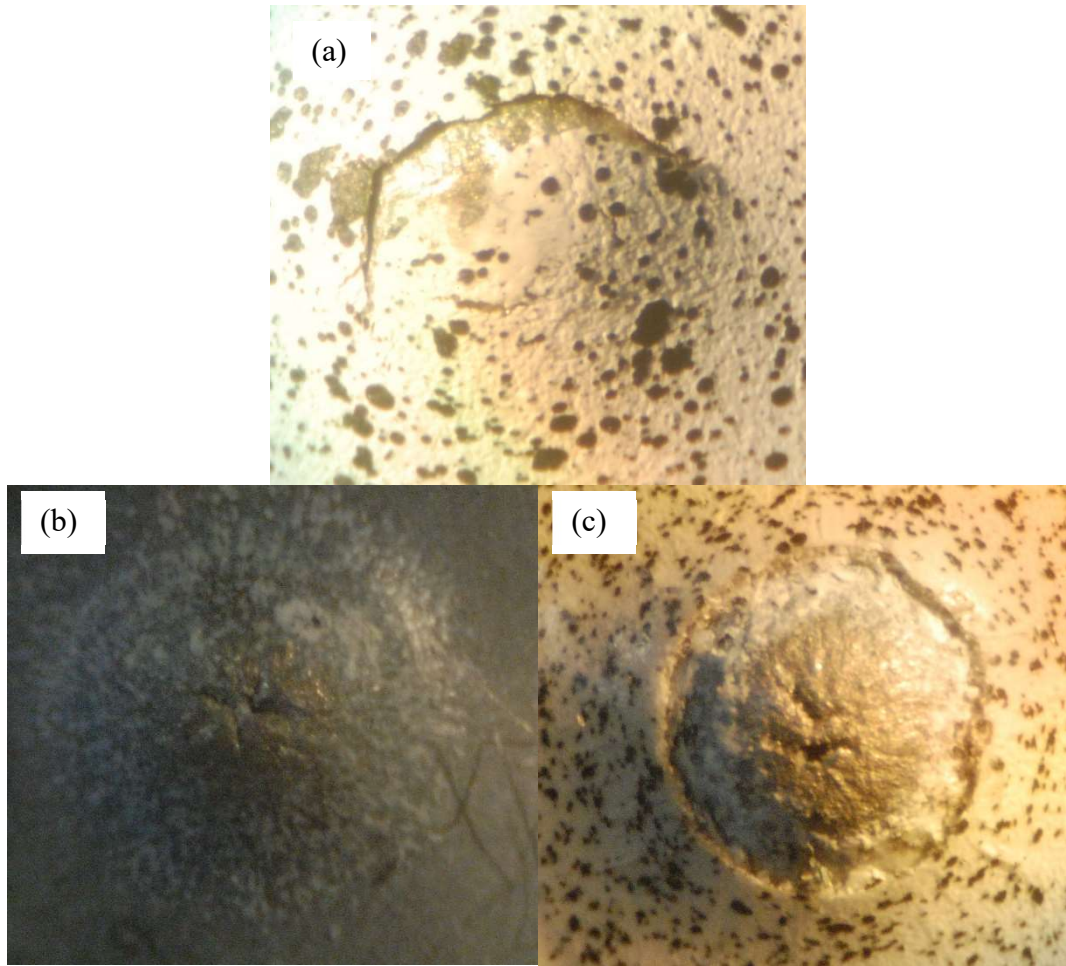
Post-test In718 punch test specimens showing fracture locations for (a) unbacked, (b) 1.83 mm backing plate and (c) 2.77 mm backing plate
